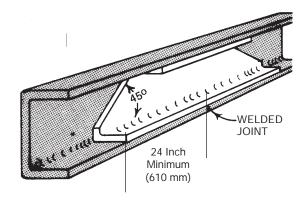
Detail of Frame Extension and Joint Welding
